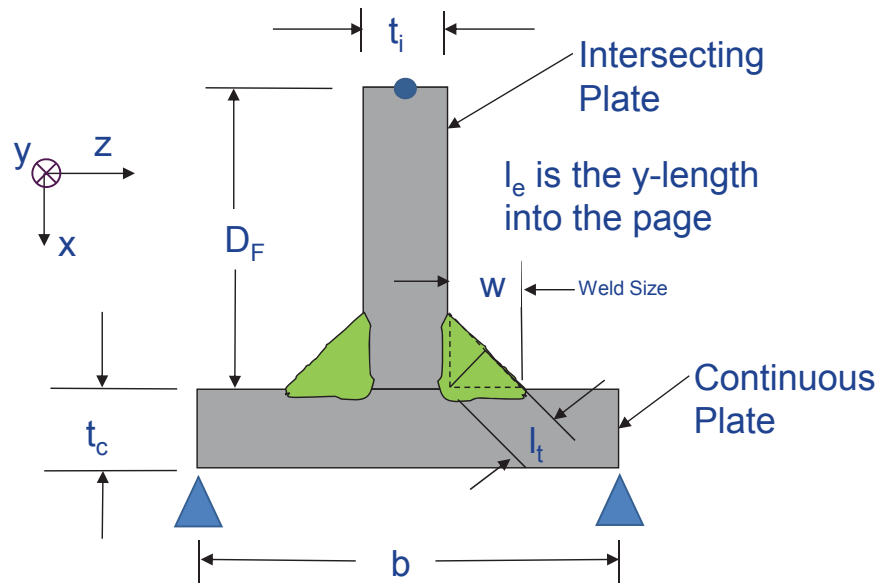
Schematic of Weld Joint showing Geometric Nomenclature
